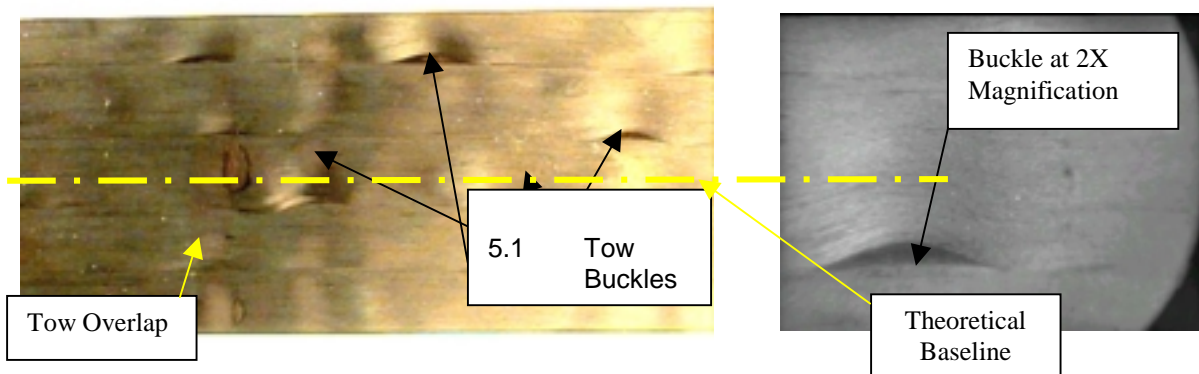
Tow Buckling in a Sample Panel Fiber Steered Panel (A3D3, inboard, upper side, center section)
